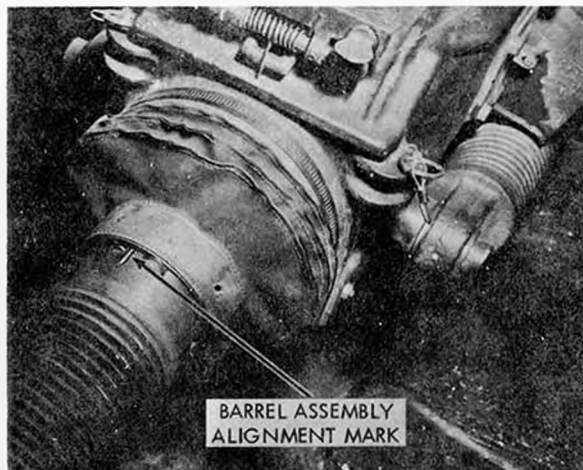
Barrel assembly positioned for reassembly to receiver (alignment mark up).
